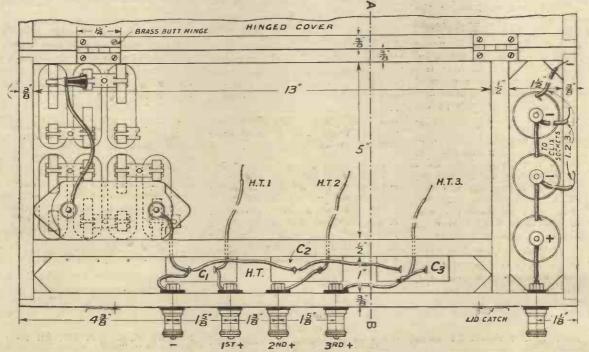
Showing how the wiring is carried out, together with the terminal markings. The H.T tappings may end in wander plugs if desired.
